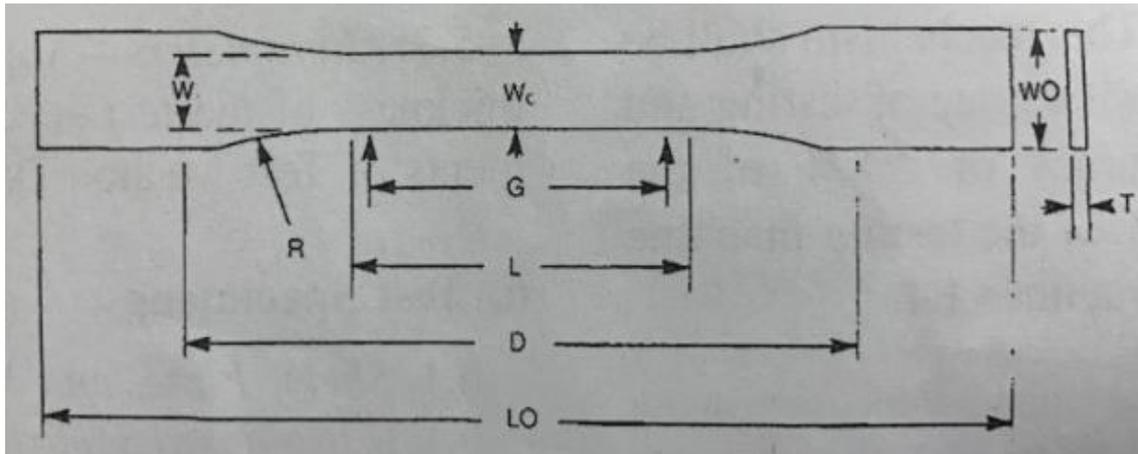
Shape and dimensions of test samples (pl refer to Table 5.2 as well)
